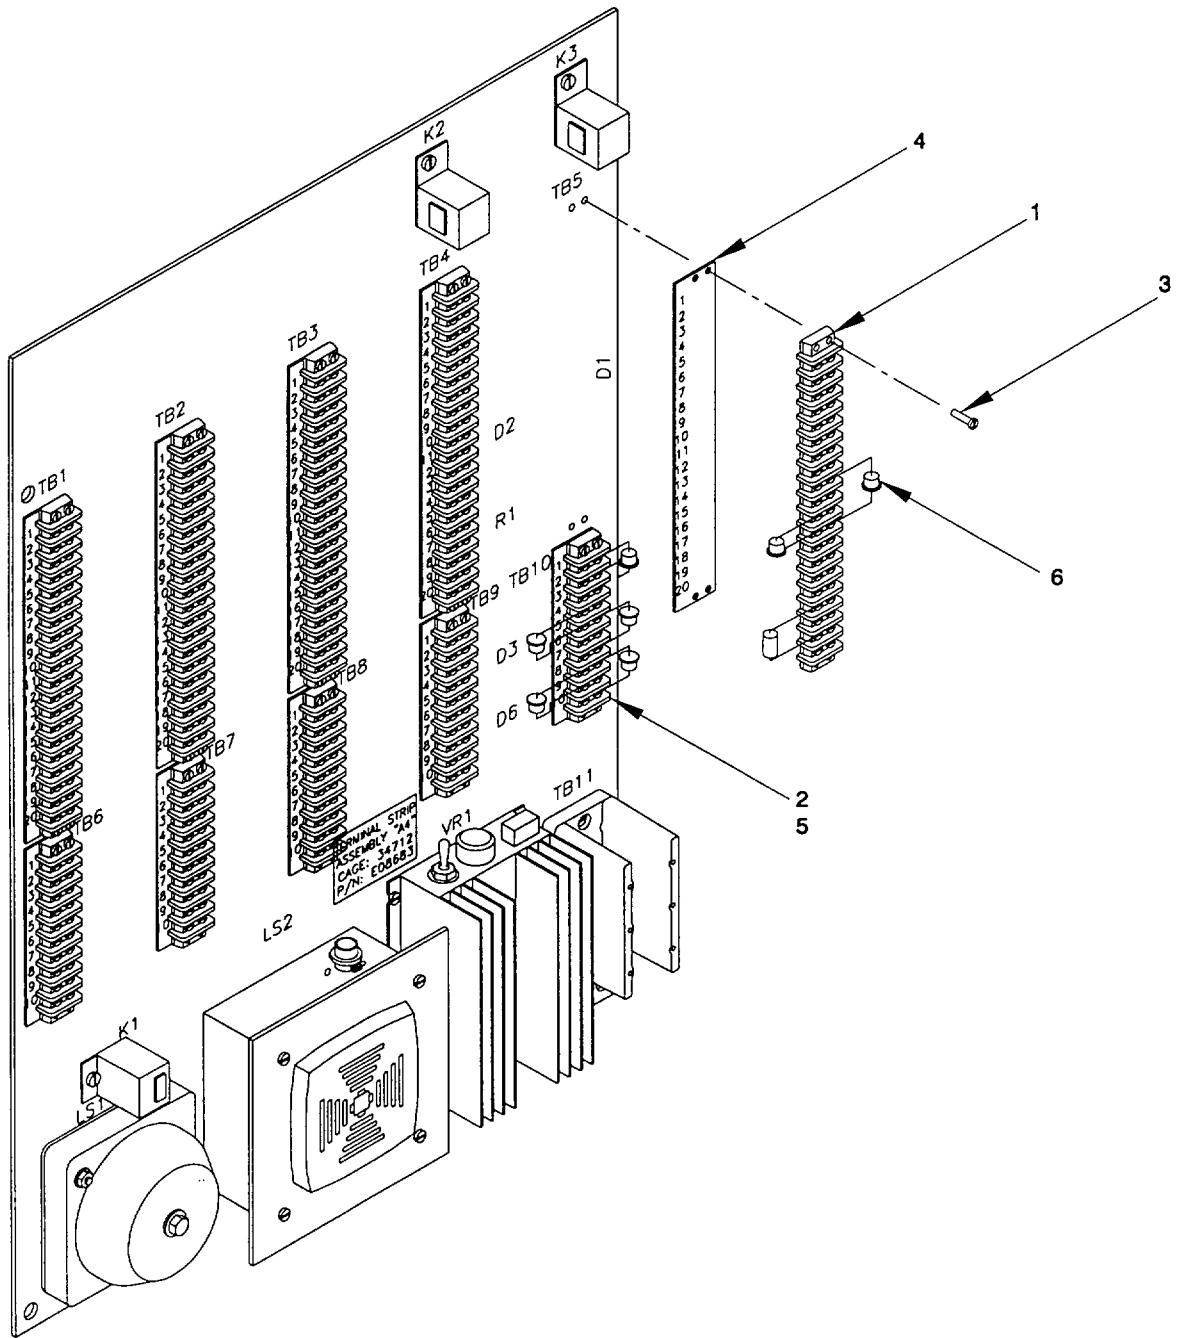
Terminal Block, Terminal Strip "A4", Remove/Install
